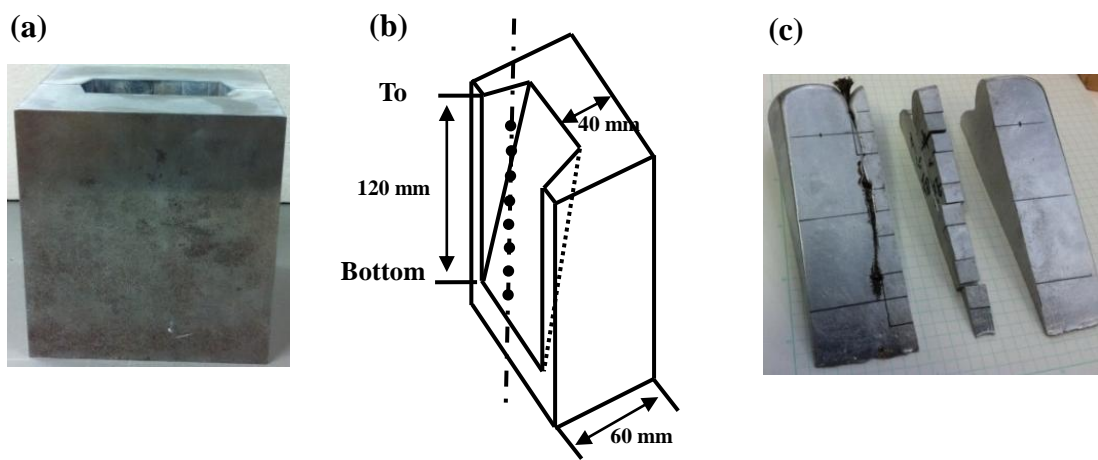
The stainless steel mold for casting (a) and its half schematic drawing (b). The locations of the thermocouples during casting were marked by the close rounds.
